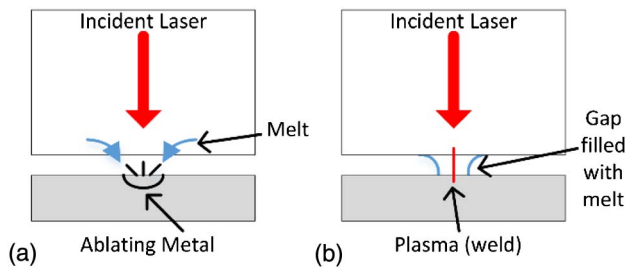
Illustration of the double-pass welding technique. (a) First pass and (b) second pass.
